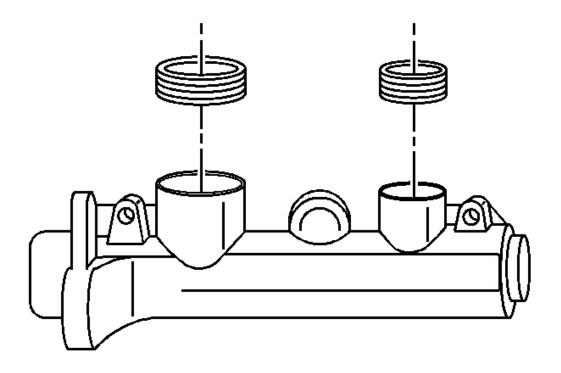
Identifying Brake Master Cylinder Seals Courtesy of GENERAL MOTORS CORP.
